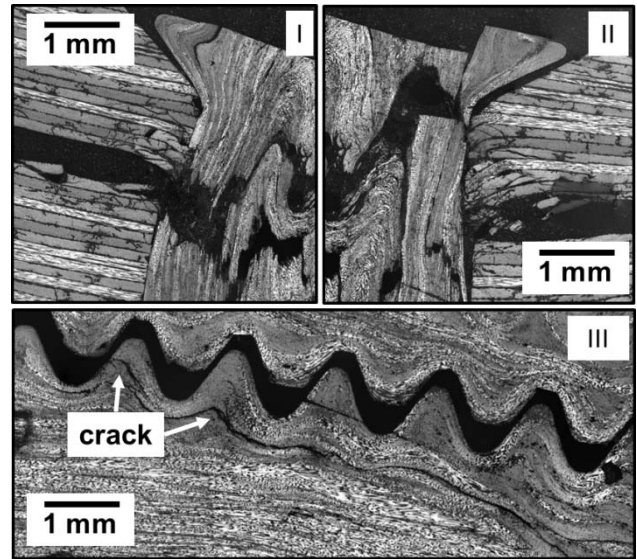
Optical microscopy cut view of a failed CFRP-bolt inside a SLS-specimen: (I) fibre failure in the bolt shaft, (II) shear failure of the countersunk head, (III) inter fibre fraction in the thread
